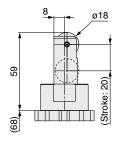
Rod end shape L/B/C/D/E: For lever type
